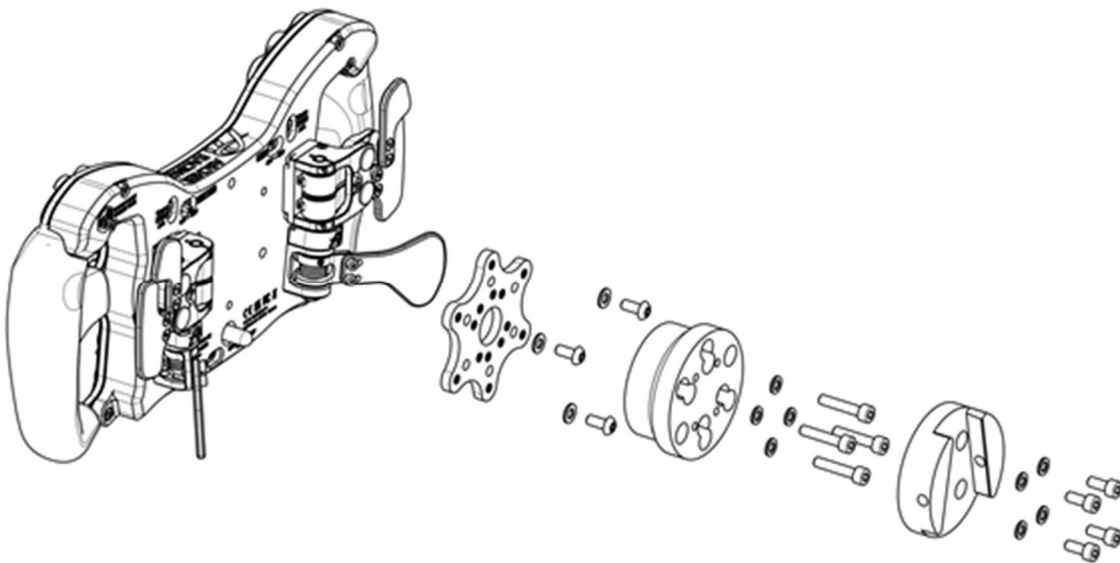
Mounting the SC2 SQR WHEEL SIDE - Simucube Adapter
